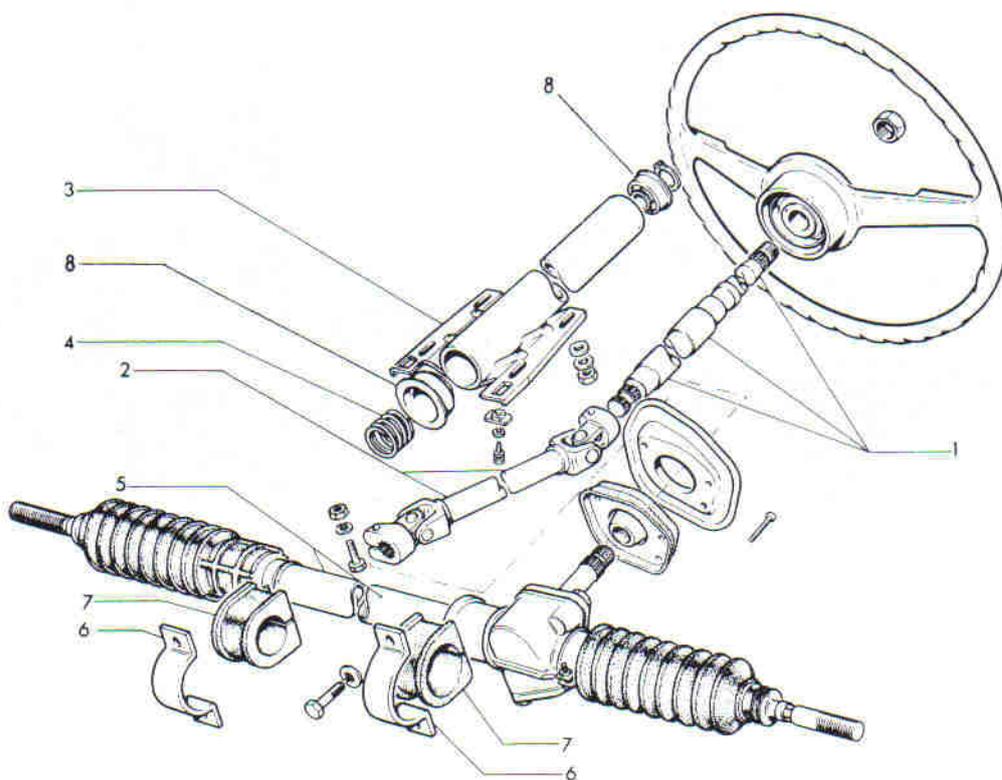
Exploded view of the steering gear (Sec 1)
